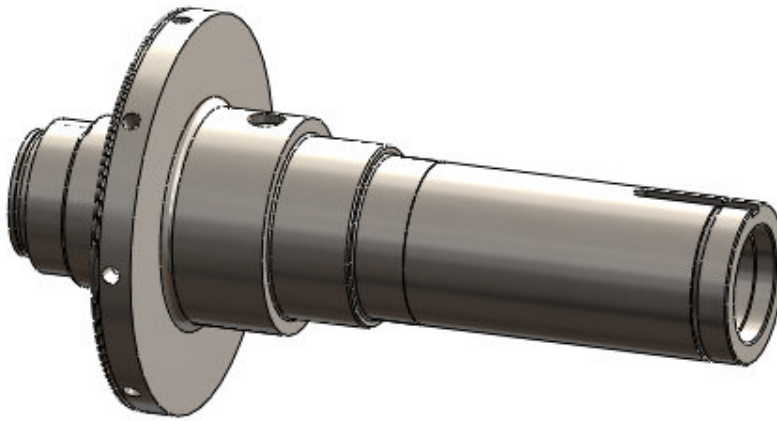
Solids end hub – machined to a smaller diameter with radial holes and an o-ring groove
